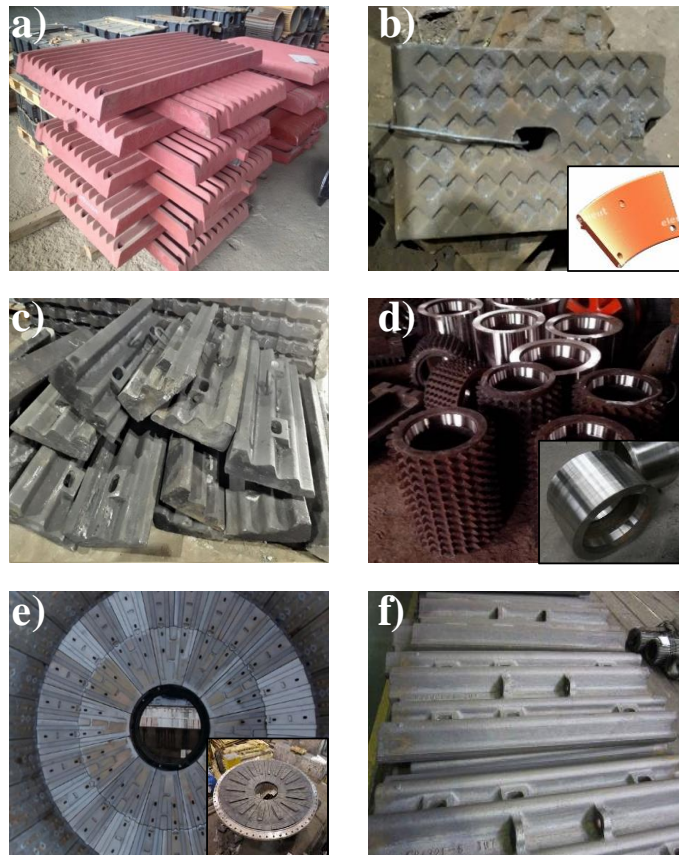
Types of liners used in crushing equipment: (a) in jaw crushers; (b) in conical crushing devices; (c) hammer crushing equipment; (d) in roller grinding equipment; (e) in disk-type grinding equipment; and (f) in ball grinding machines.
